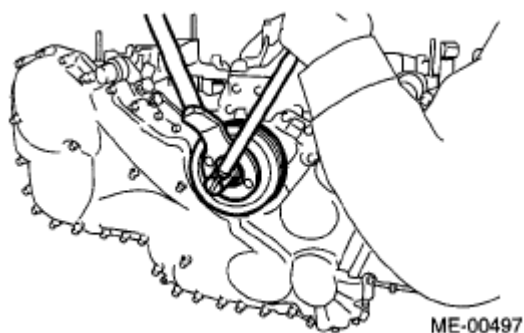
Removing Crank Pulley Bolt Using Crank Pulley Wrench ST 499977100
